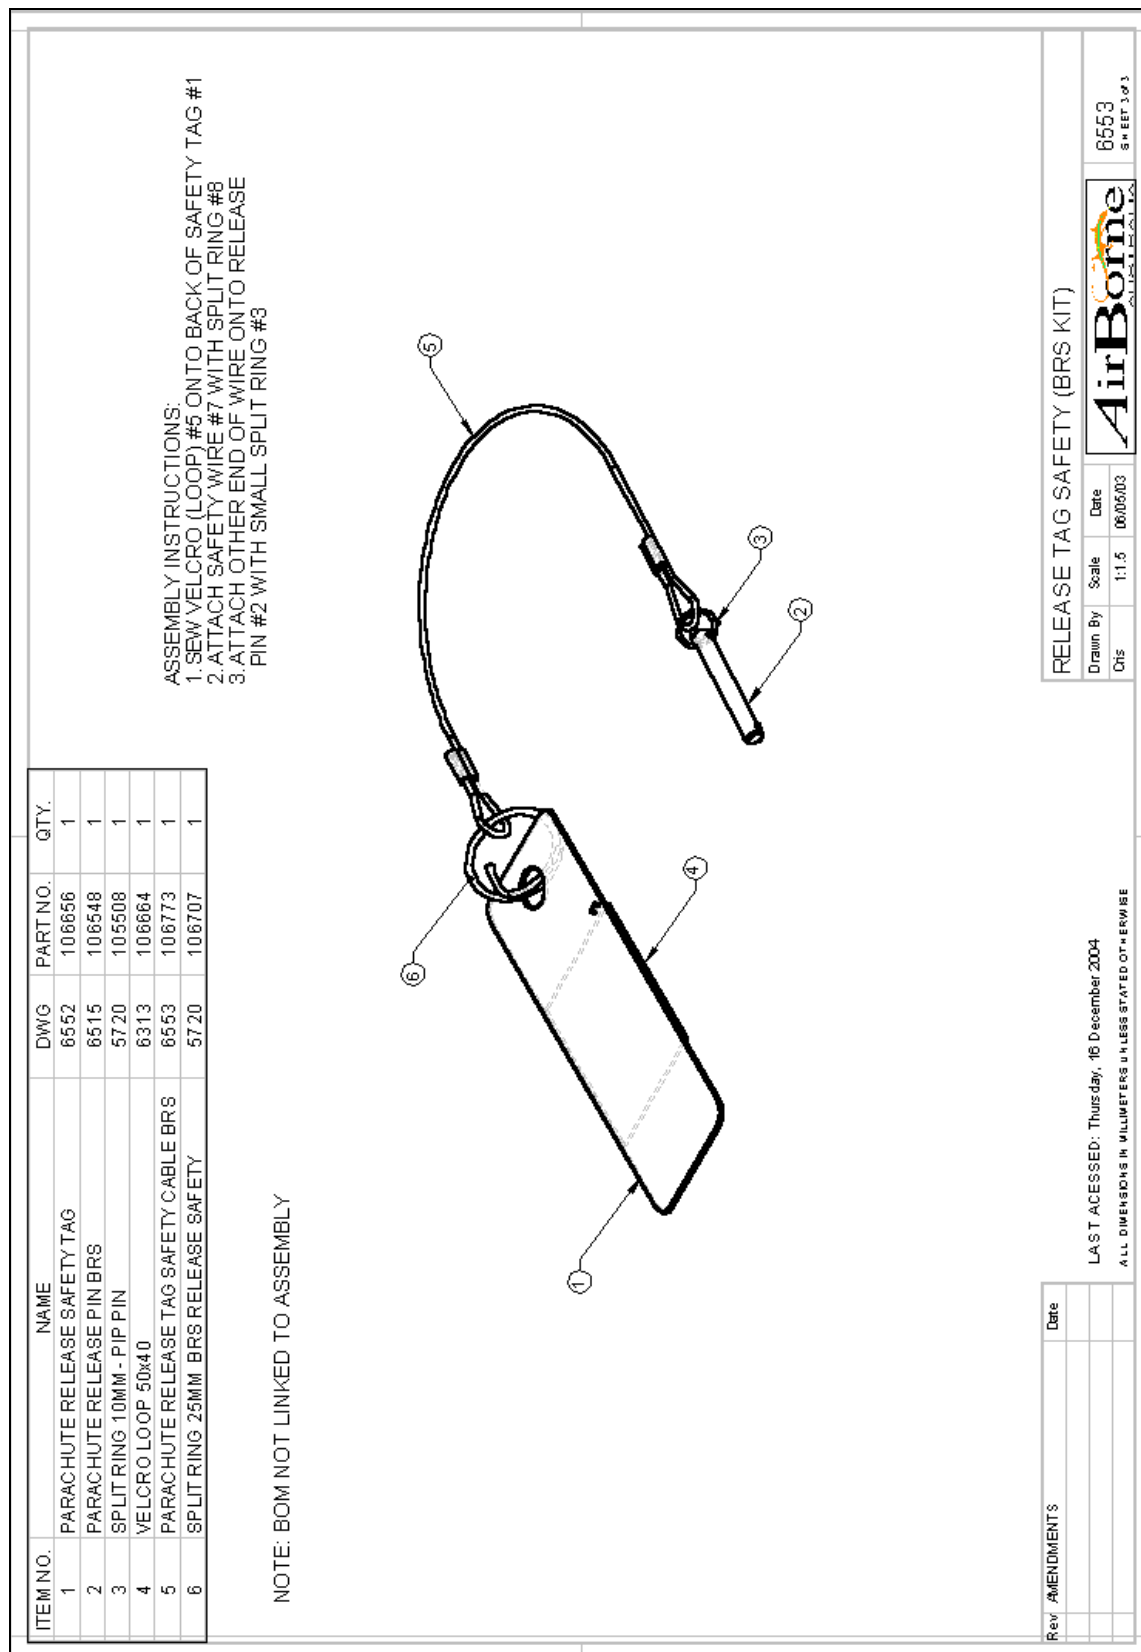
Parachute Mount Assembly. Drawing A4-6553 (Sheet3)
